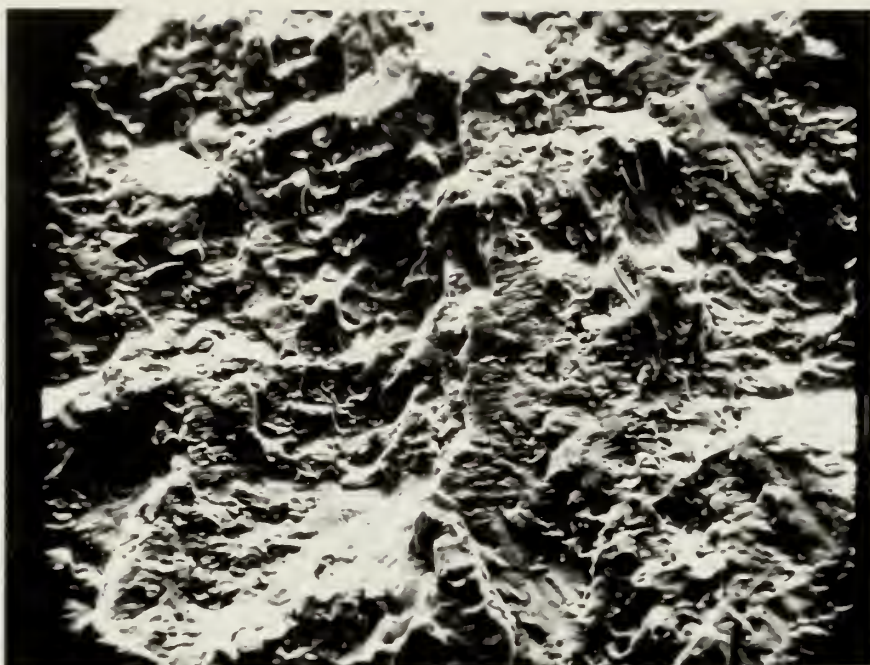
Inconel 625 weld metal fatigue fracture surface. 630X.
